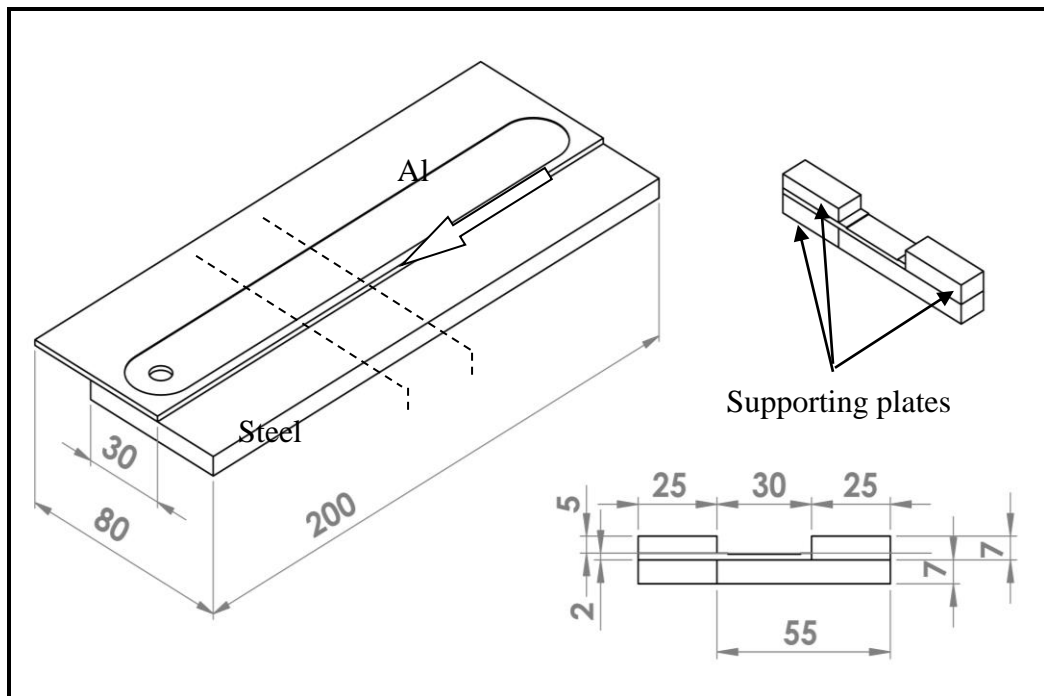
lap joint schematic and tensile shear specimen (dimensions in mm).
